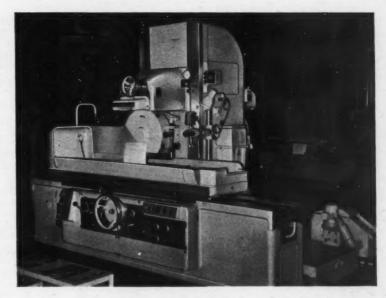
This type 3722, horizontal-spindle surface grinder, built by the Moscow grinding machine works, will accommodate work up to 15.75 in. high above the table, and can be operated on an automatic cycle
